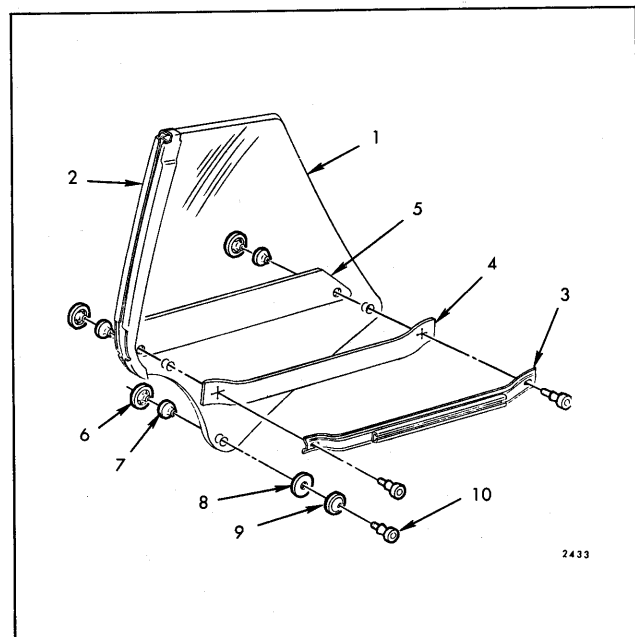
Rear Quarter Window Assembly - "B-C-47-57-67" Styles
